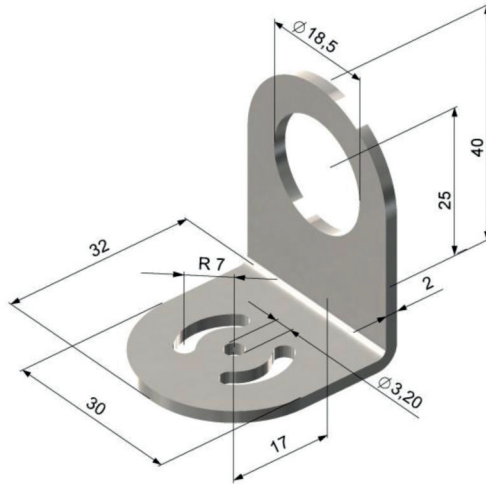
Mounting bracket, adjustable in one axis for HS [TM-FBMH-CT]
